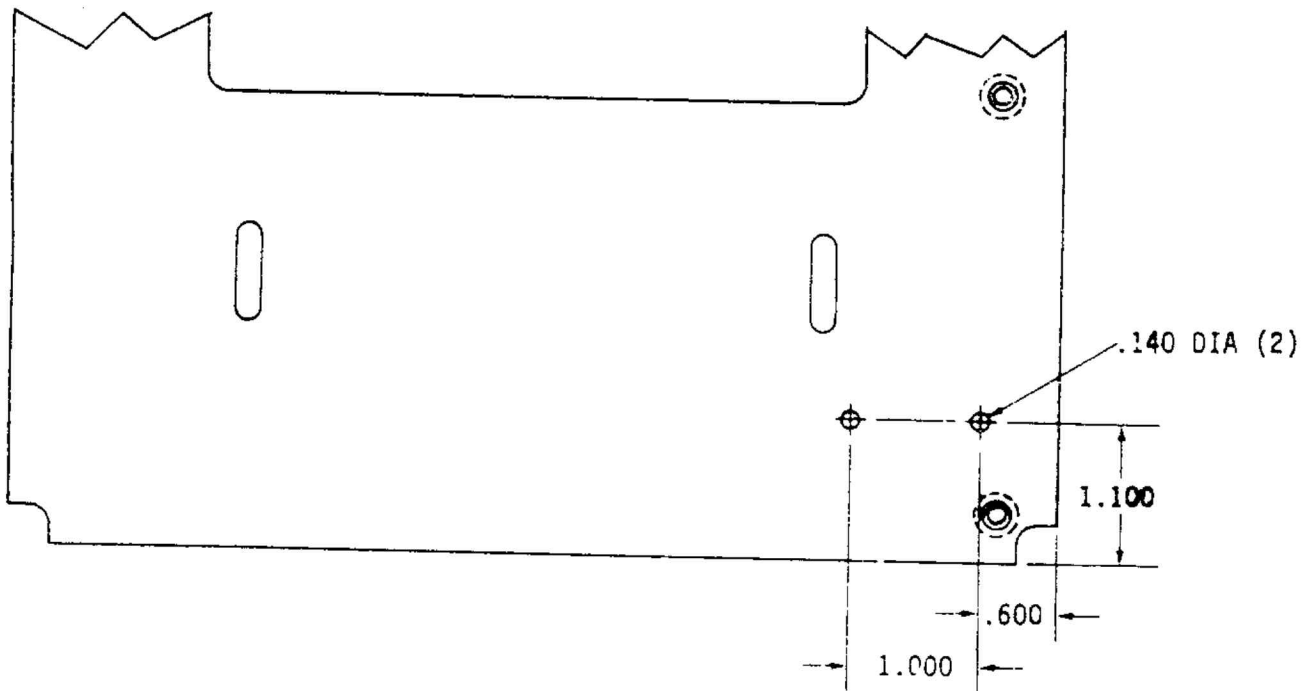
Partial view of power unit bottom showing voltage regulator mounting holes. All dimensions are in inches.
